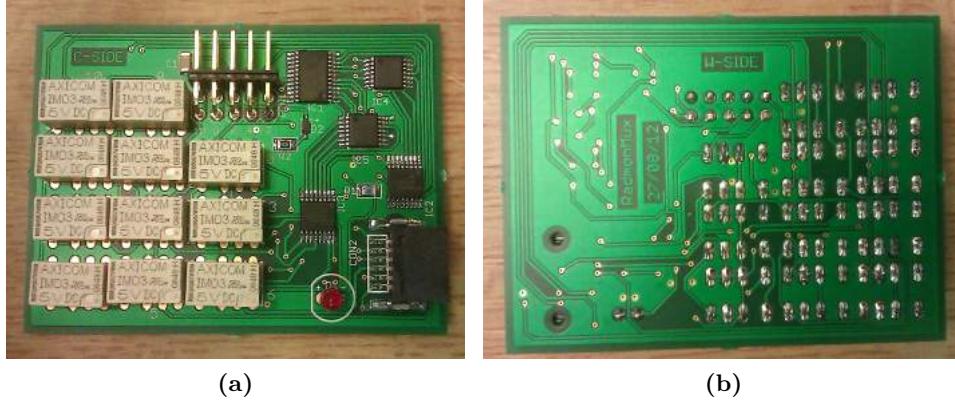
multiplexing PCB front-side (a) and back-side (b).
